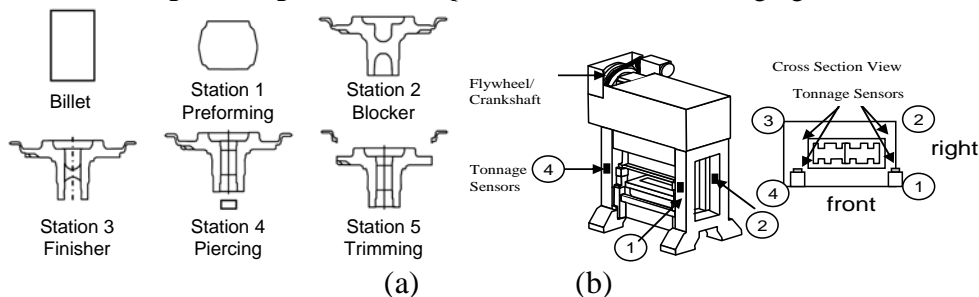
(a) A forging process with five operations; (b) sensor mounting on a forging machine
